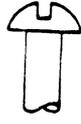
MACHINE SCREWS, HEAD STYLES
